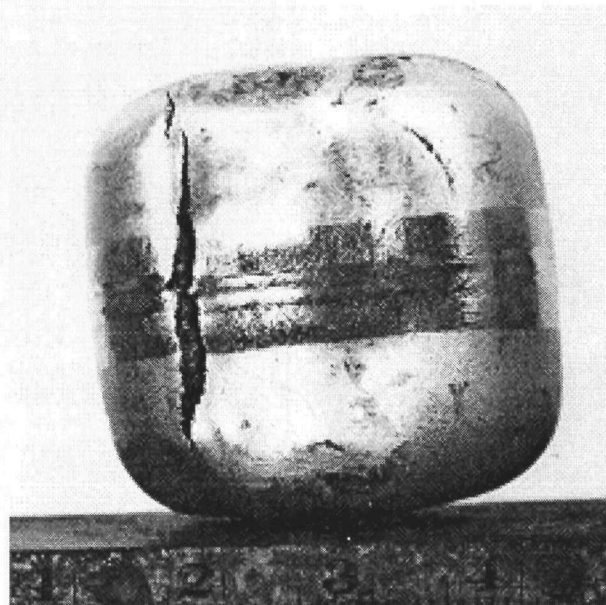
The impact face of capsule HF-373 was traversed by two cracks; 2X.
